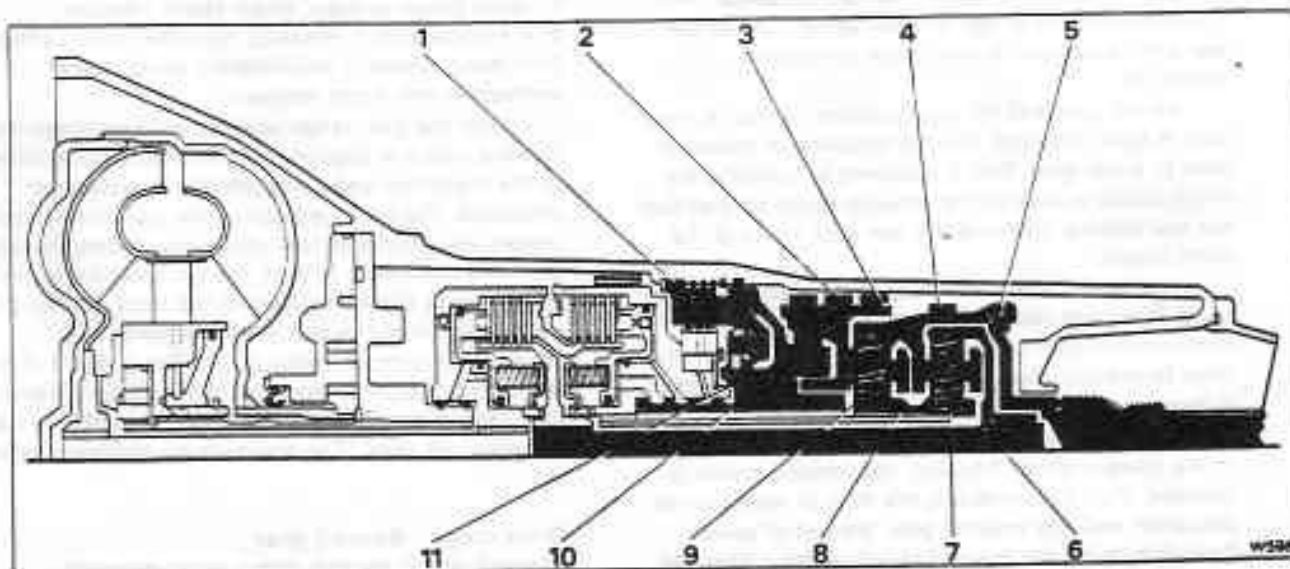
Sectioned view of the transmission showing the intermediate clutch and gear unit
